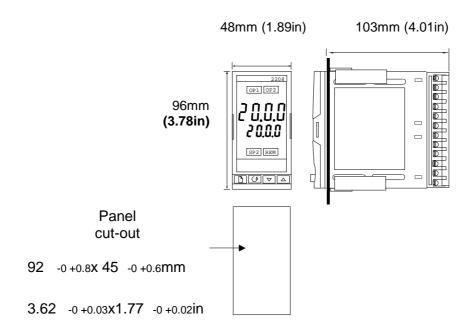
Outline dimensions of Model 2208e alarm unit
